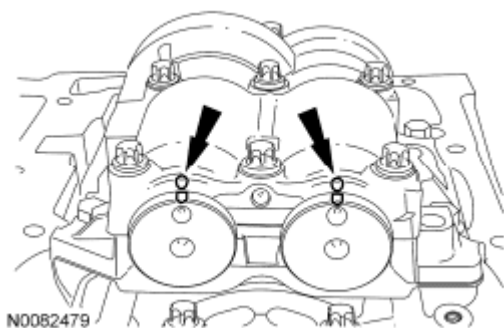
Locating Balancer Unit And Shafts Reference Mark
